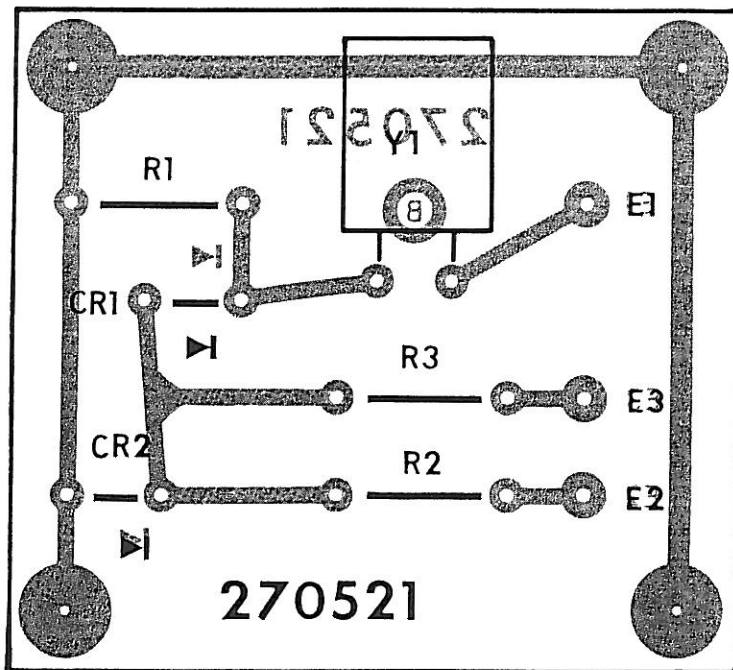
Part 270521-1 Reference Marker Assembly (A2A3A2),
